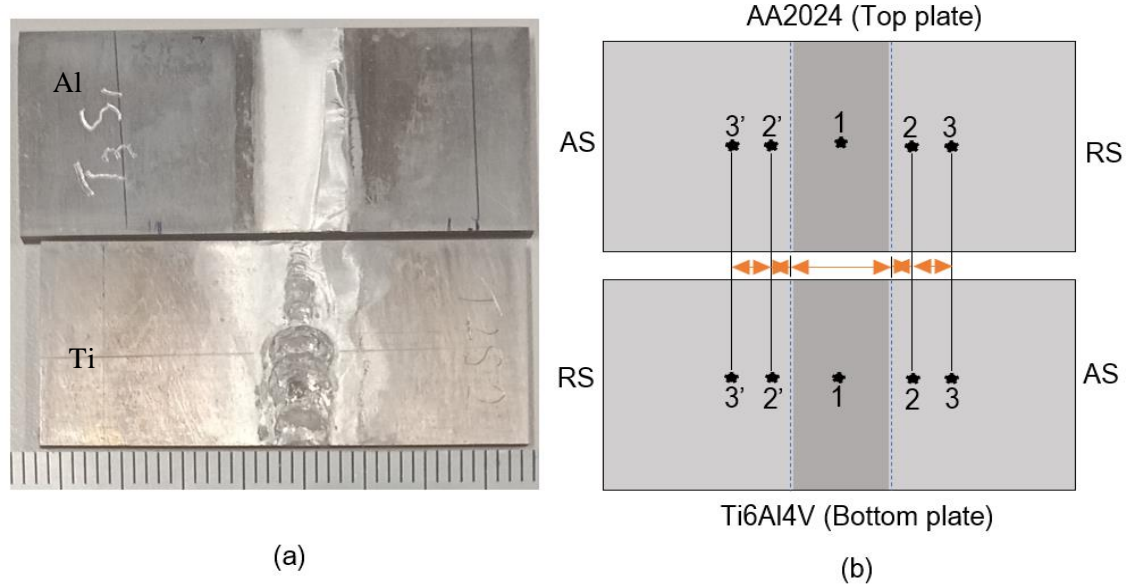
Fracture surface measurements: (a) pictorial view of an FSL weld sample displaying top and the bottom plate fracture surface and (b) schematic illustrations of Al and Ti fracture surfaces with locations where SEM images were taken (Locations 1-2 and 1-2' = 5.5 mm, Locations 1-3 and 1-3' = 8 mm).
